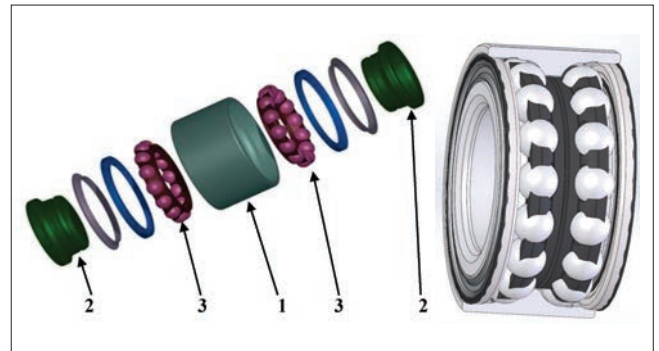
An example of a design solution for a road wheel bearing with the use of a compact double-row angular contact ball bearing – hub-bearing of the first generation: 1 – outer ring, 2 – inner ring, 3 – ball basket
